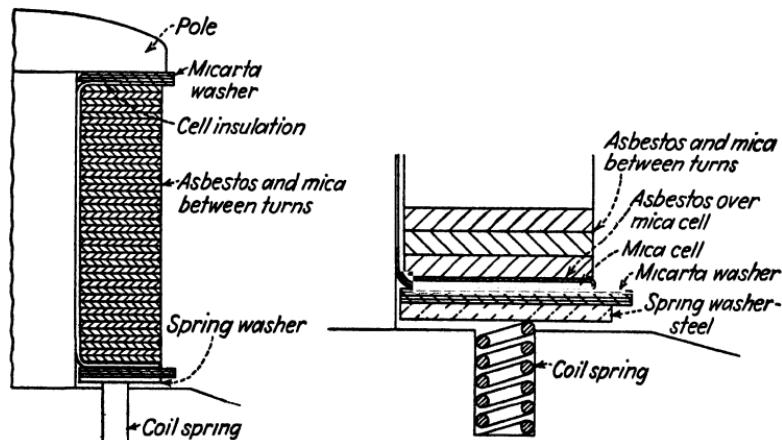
Section of water-wheel generator field coil. (Courtesy of Westinghouse Electric & Manufacturing Co.)
